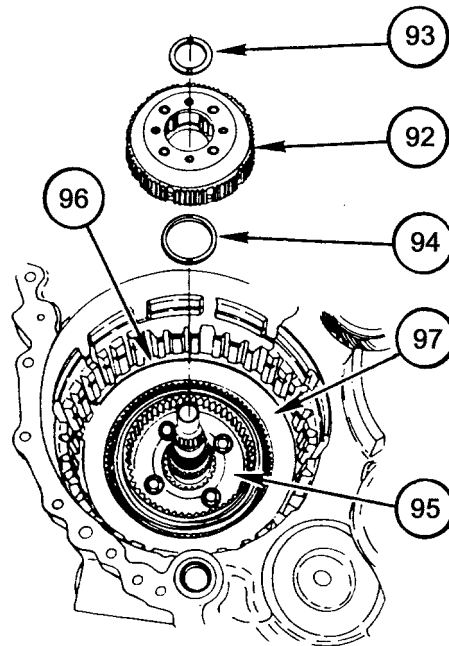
Third Clutch Piston Housing Assembly and Retaining Ring.
